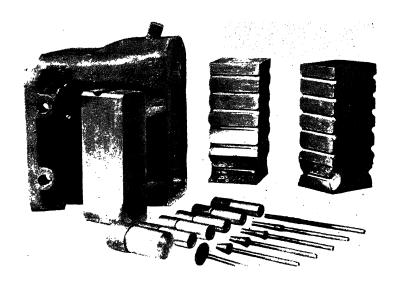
Tools for high-duty forging machine and work sample in steps as made. (National Machinery Co.)
